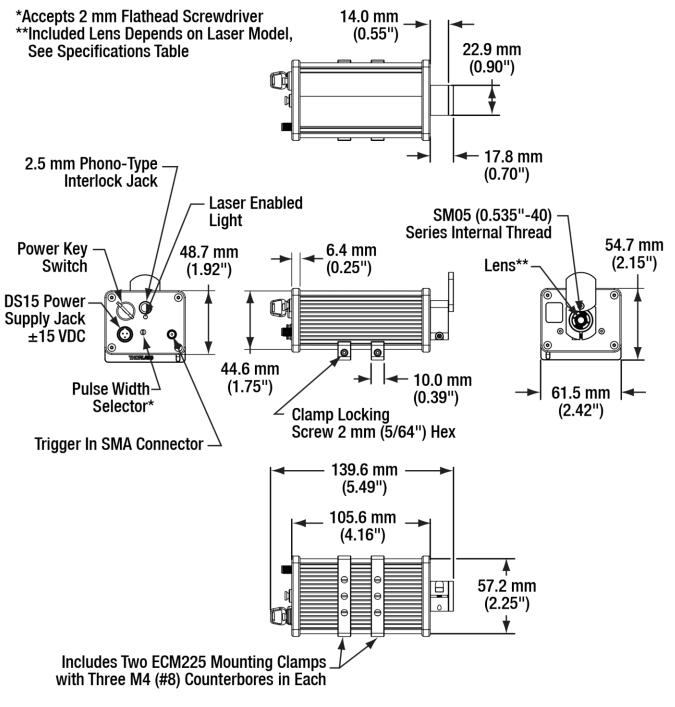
Mechanical Drawing for Item Numbers Ending in C
